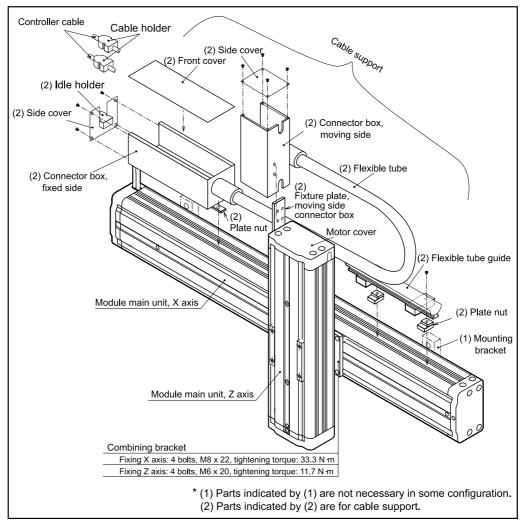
A type combination: Assemble of connector box (moving side) and fixture plate
